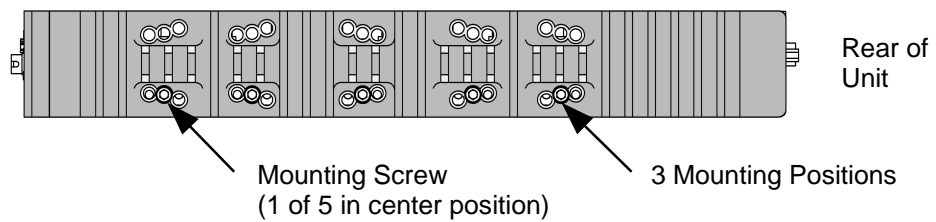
Model 708 Side Panel - Base Plate Mounting Screws
